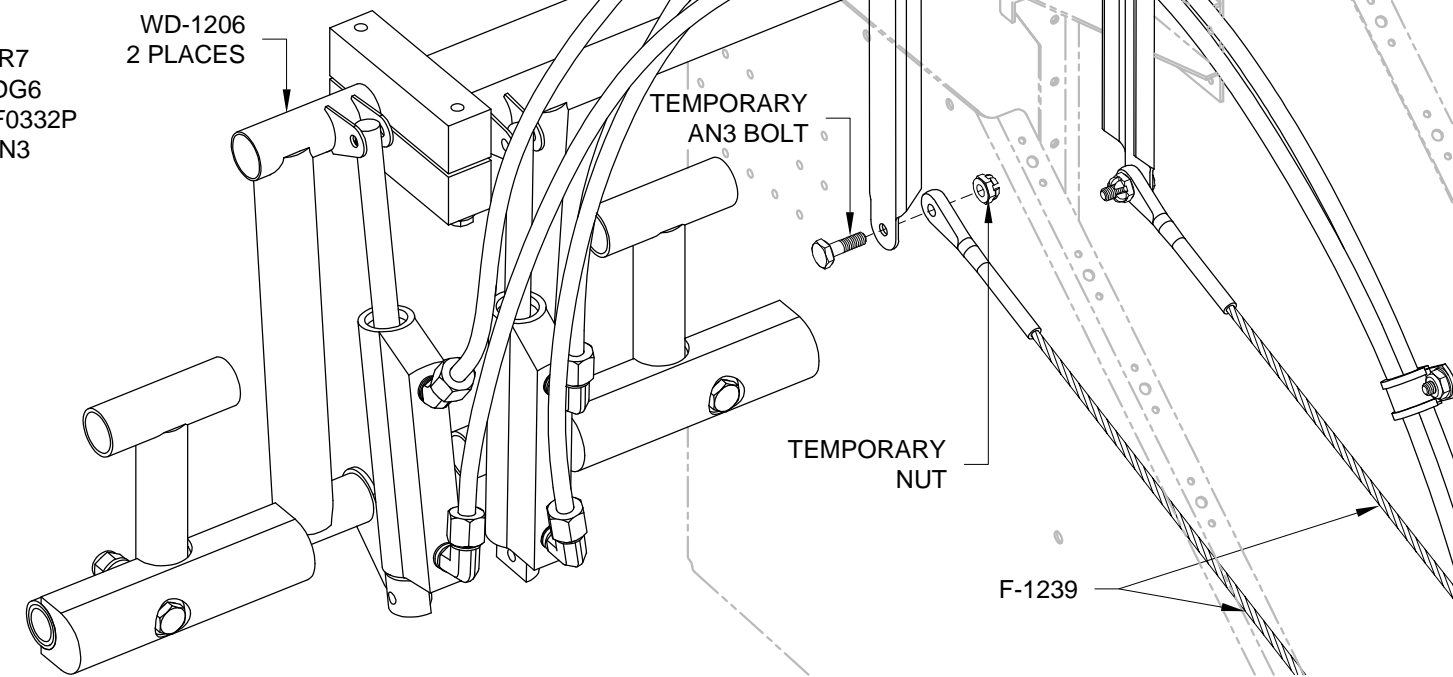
ATTACHING RUDDER CABLES TO RUDDER PEDALS
